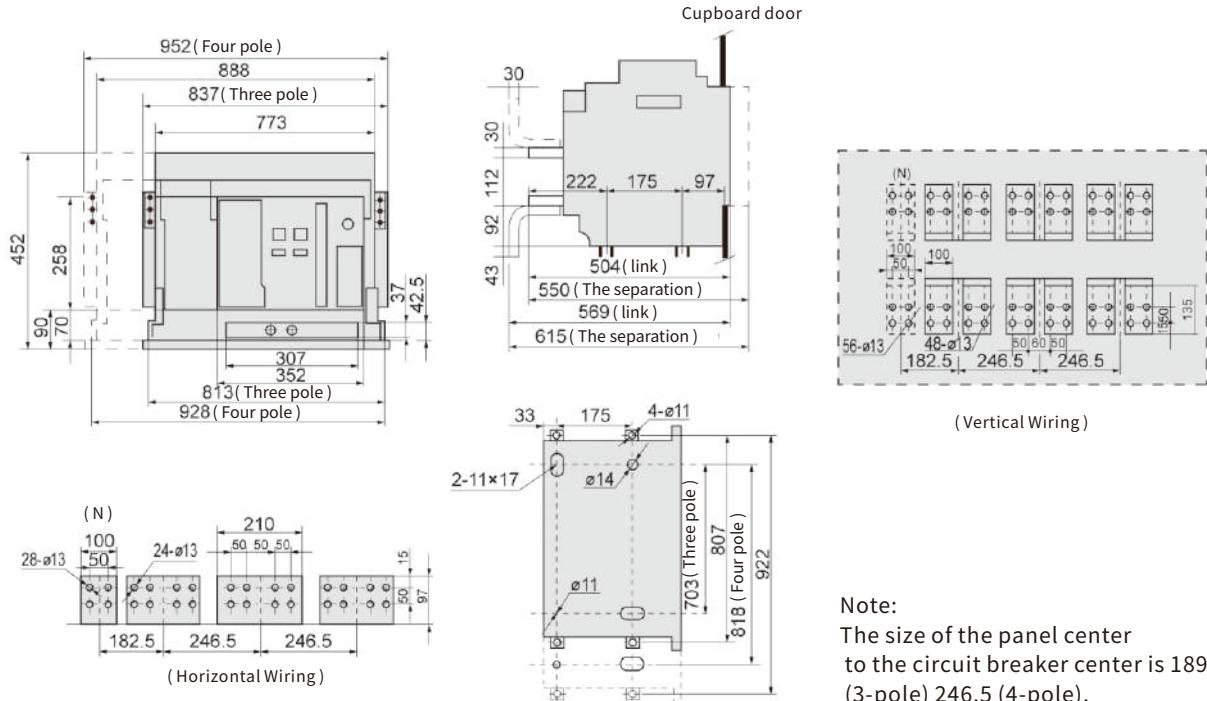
Outline and installation dimensions of drawout type circuit breaker (EKA1-6300, 6300/4 In=4000, 5000)
